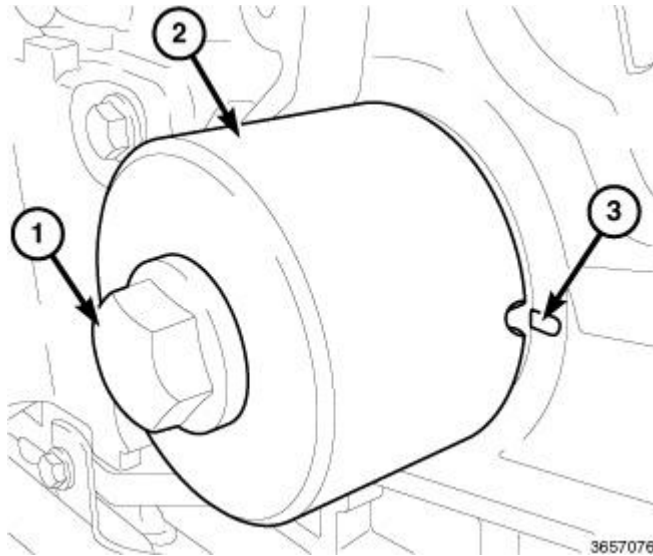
Front Crankshaft Oil Seal Installer & Bolt
